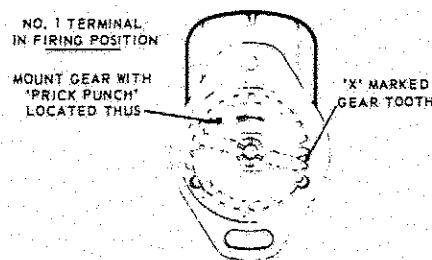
, DRIVE GEAR MARKING AND ASSEMBLY
